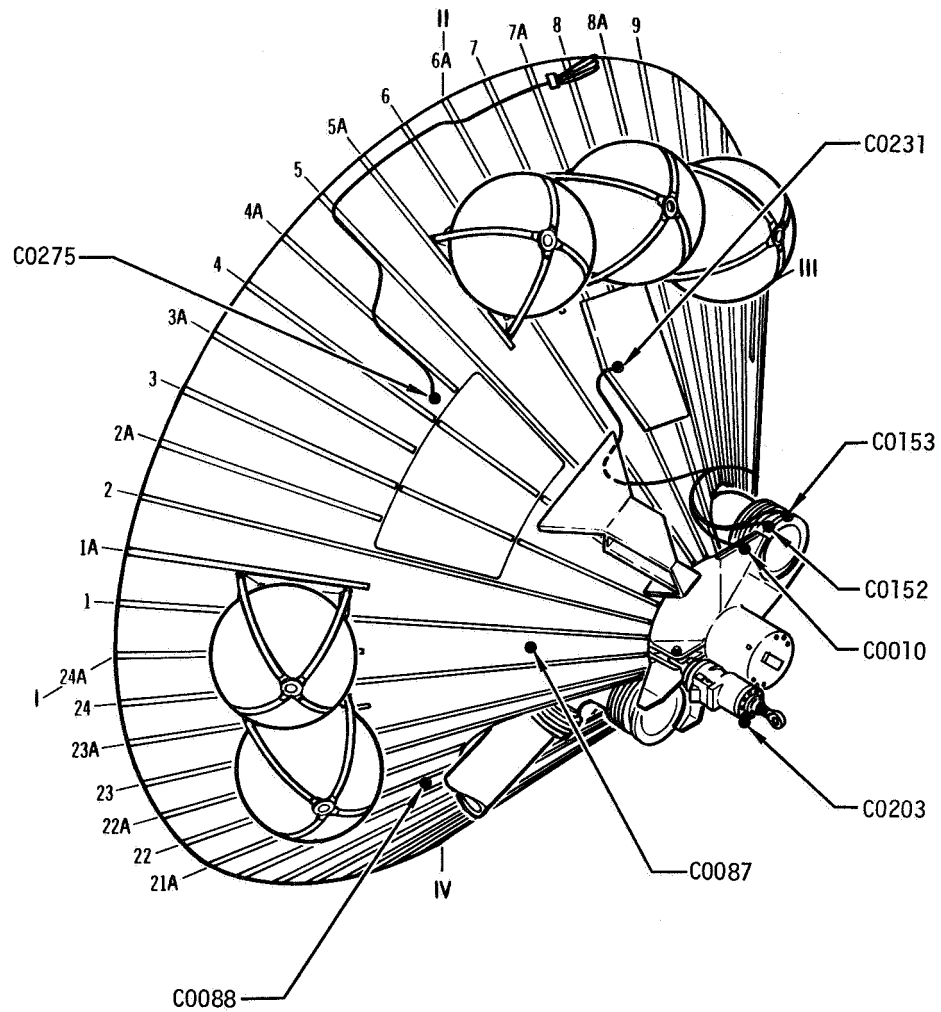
Engine Area Transducer Locations (Sheet 3 of 3)
